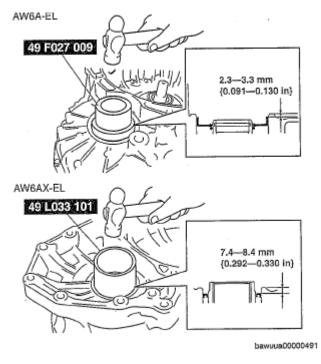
Tapping Oil Seal - Converter Housing Side Courtesy of MAZDA MOTORS CORP.
